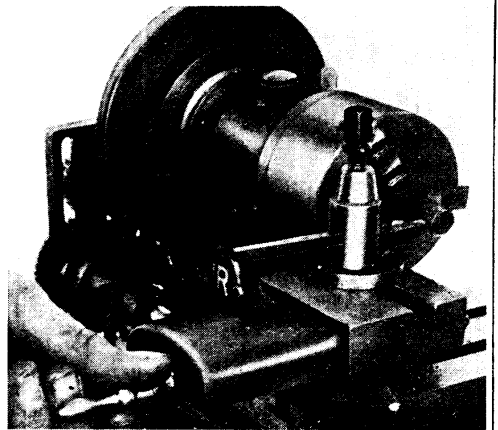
This photograph shows the method of turning a small ebonite bush in a screw-cutting lathe
